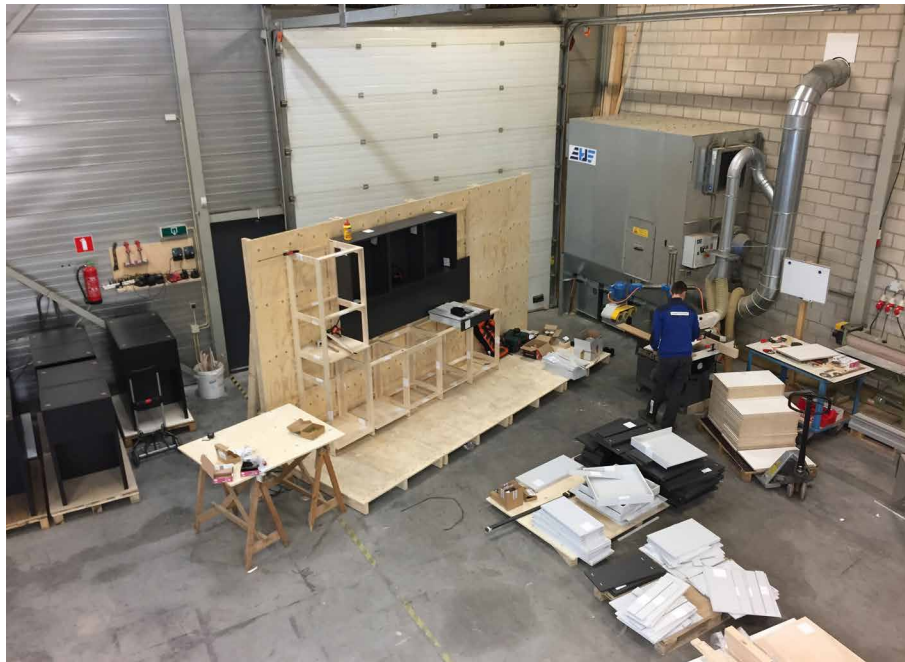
CIK prototype 1 being assembled with a black style package
